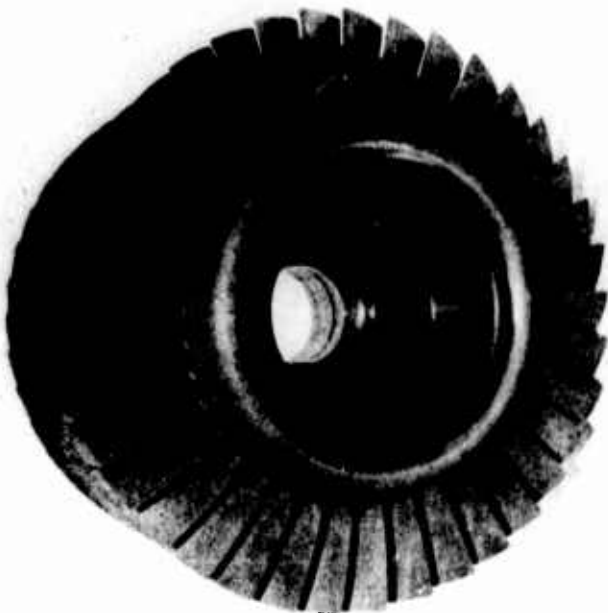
IFRT Engine No. 1, Condition of Parts after 20 Minutes
